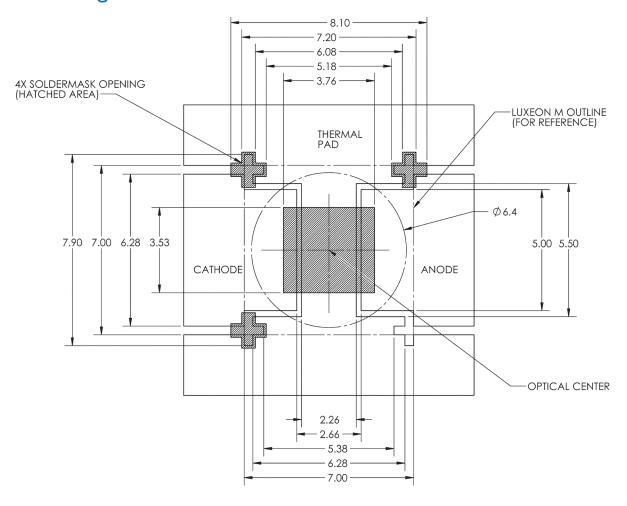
Recommended LUXEON M footprint design for Metal Core PCB. All dimensions are in millimeters.
